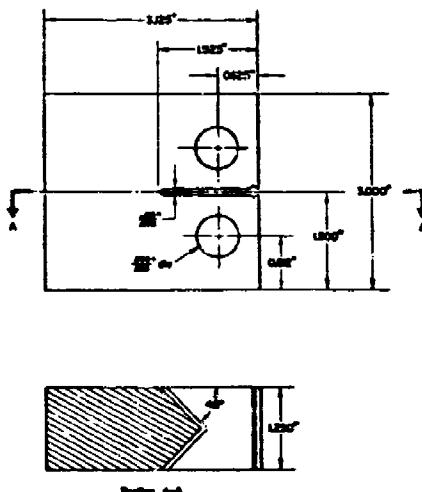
FRACTURE TOUGHNESS SPECIMEN
